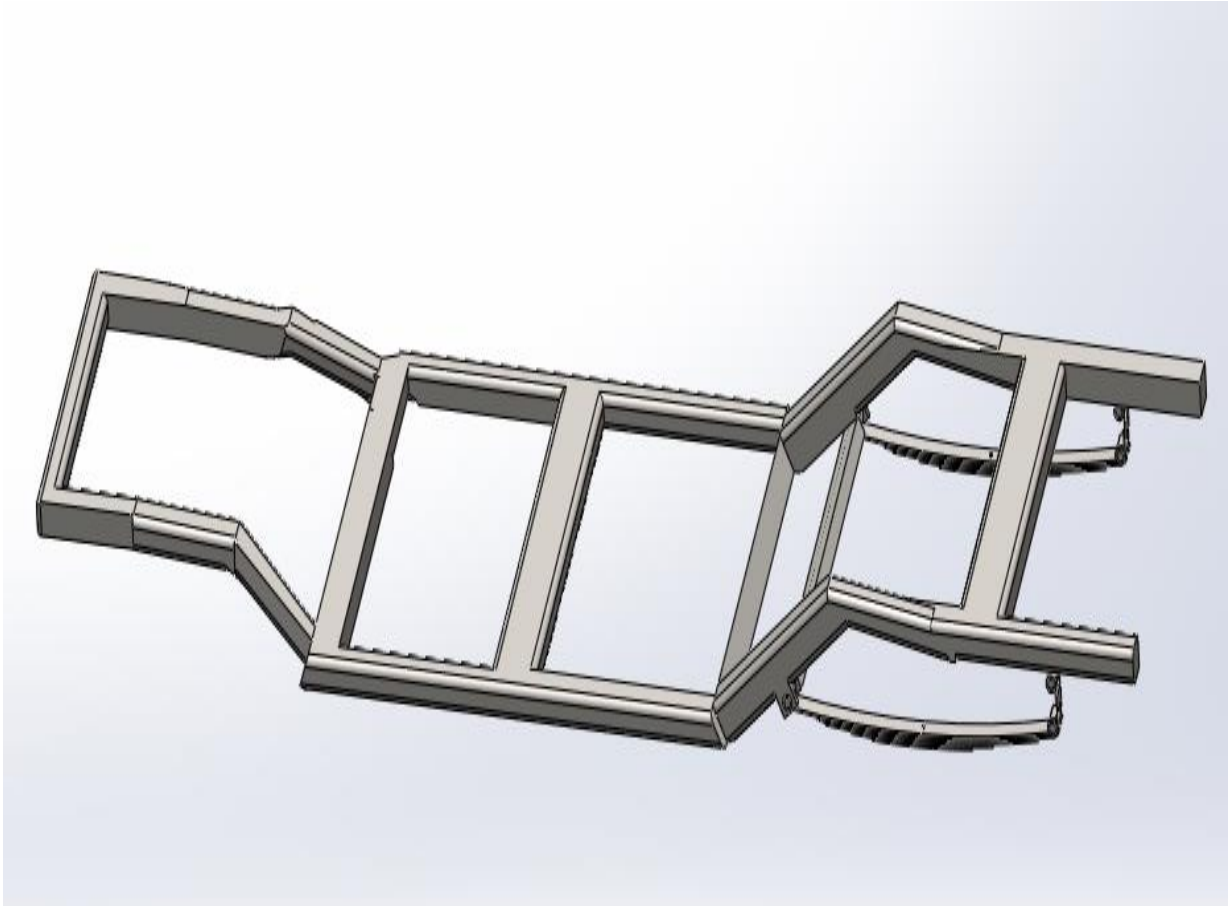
12: Chassis assembly of conventional steel leaf spring using solid work 2013
